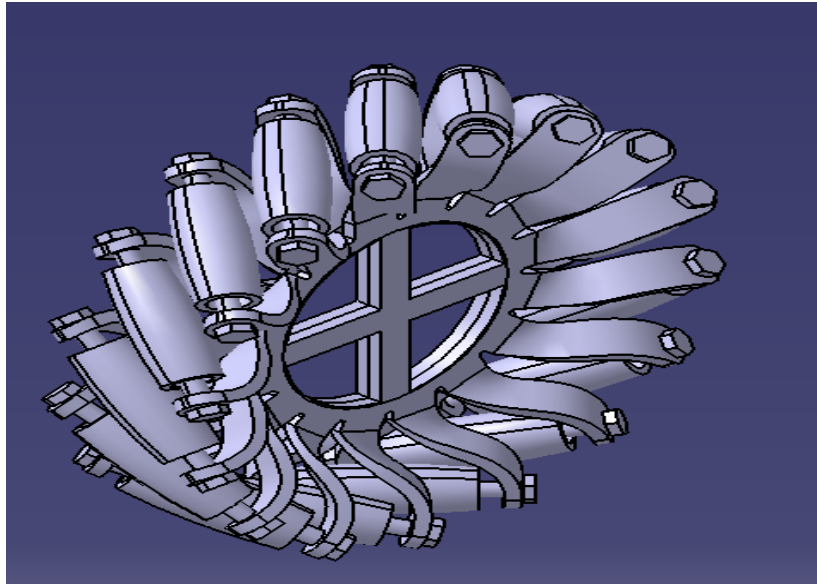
Modified Mecanum Wheel 1 Designed in CATIA
